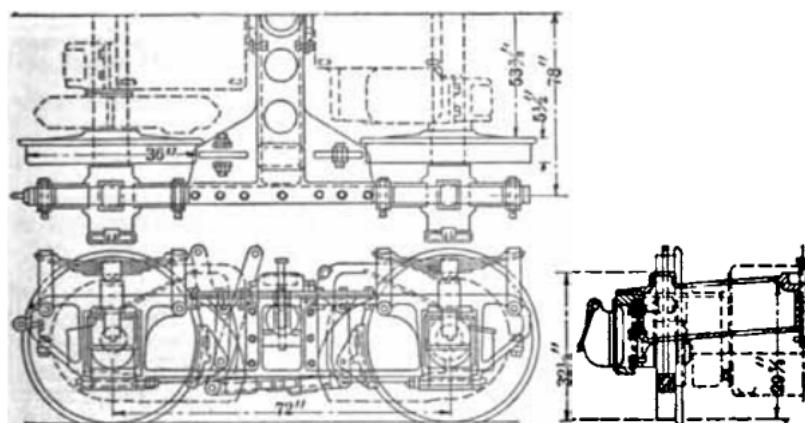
Motor, locomotive-frame, rigid bolster.
